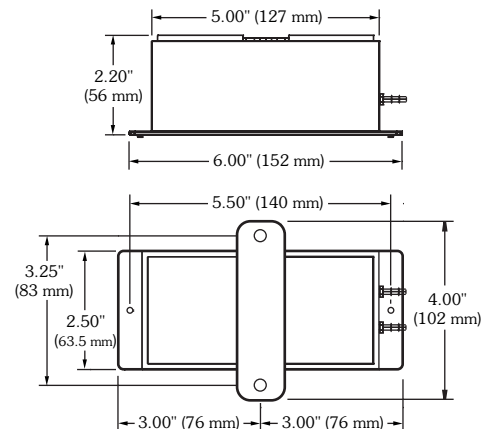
PR-274/275 Low Pressure Transducer Dimensions shown in inches and millimeters (mm).
